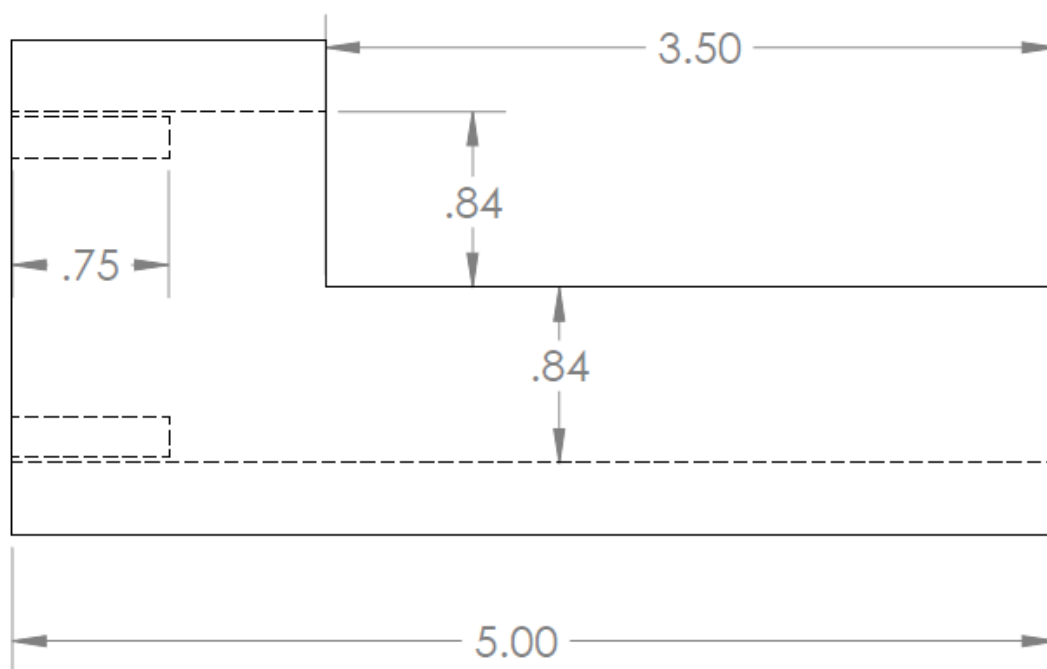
Side view of the probe stabilizer. All dimensions are in inches.
